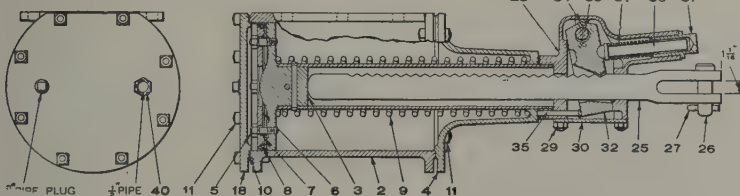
Load Brake Cylinder, 10 in. by 12 in., with Notched Push Rod and Enclosed Locking Mechanism, for Empty and Load Freight Brake Equipment.
